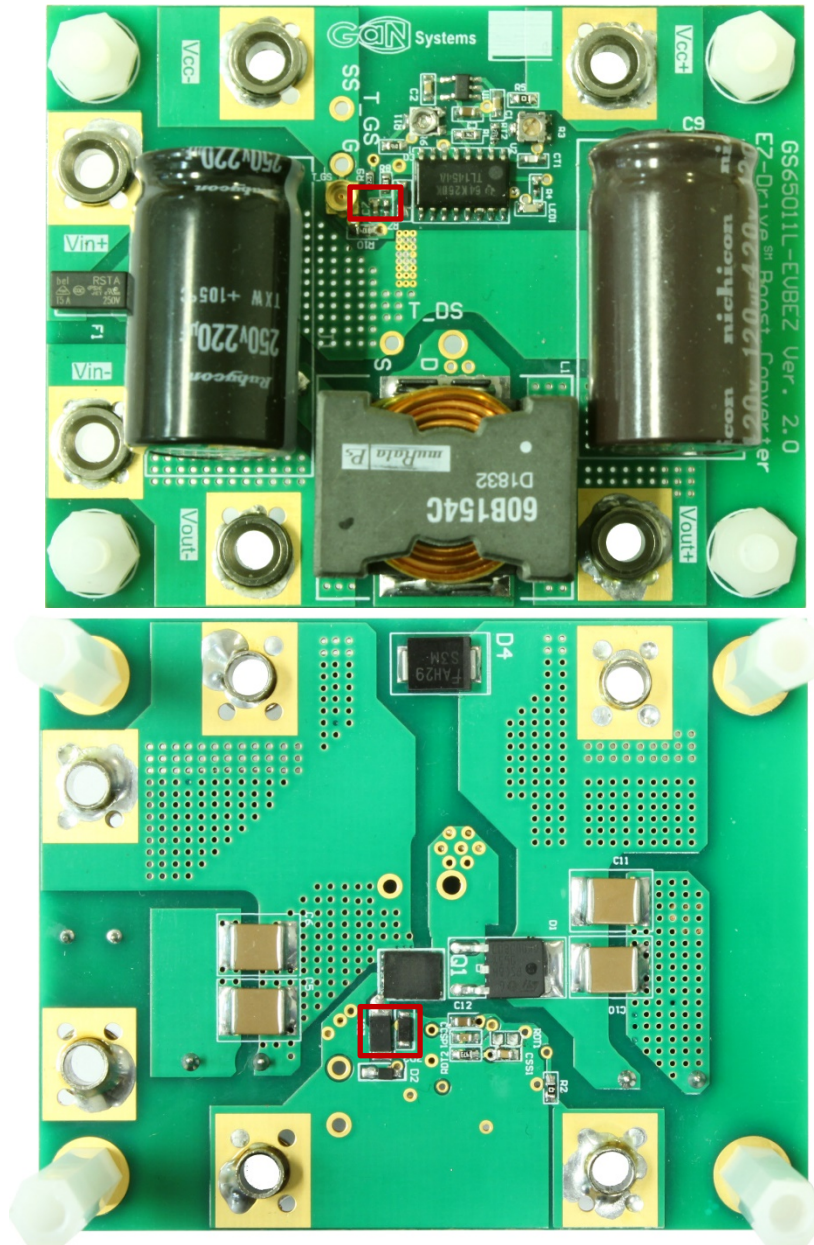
• GS65011-EVBEZ Evaluation Board Assembly
